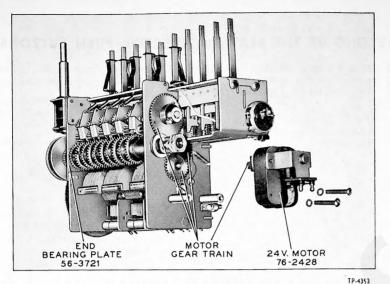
MOTOR GEAR TRAIN AND MOTOR, SHOWING DETAILS OF MOTOR MOUNTING
